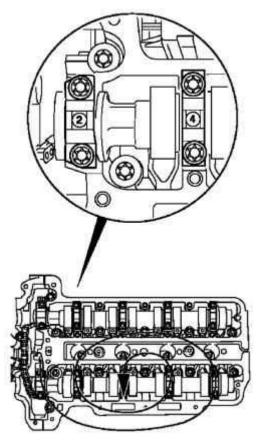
Order untwisting the mounting bolts camshaft bearing caps
